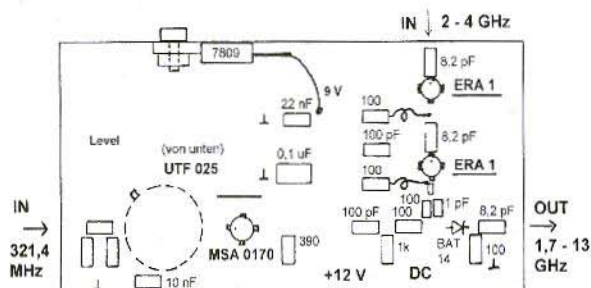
Harmonic mixer component layout. The PIN diode controller is on the earth side
